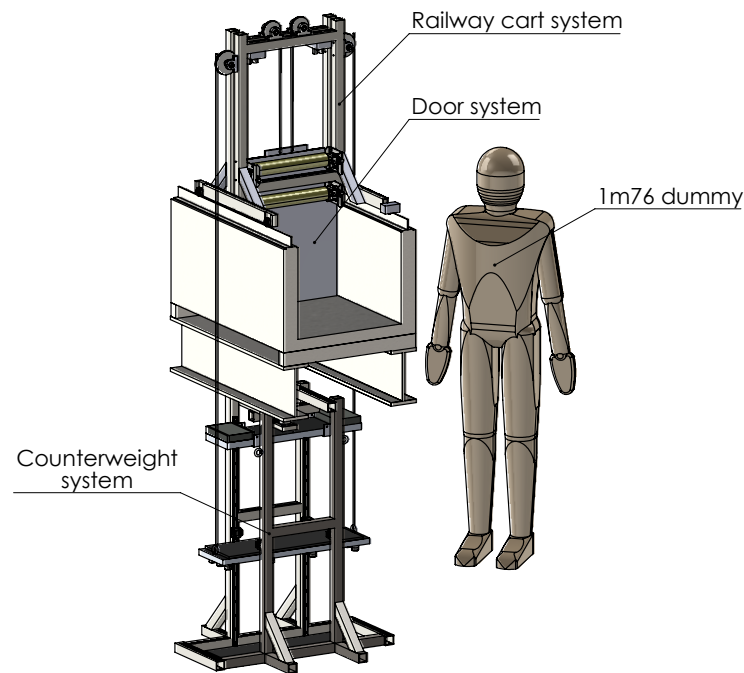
Isometric view of the CAD Design. A dummy is presented next to the mechanism to give the reader an quick idea of the dimensions
